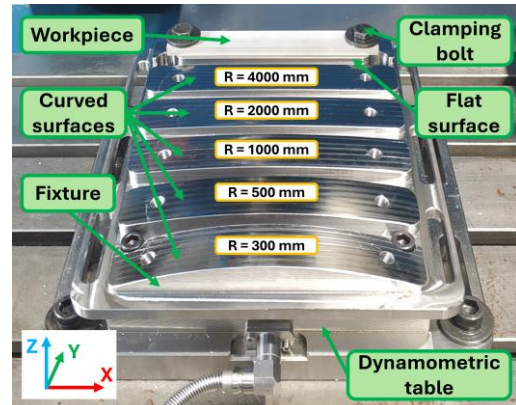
Experimental setup for machining slender workpieces under bending loads.
